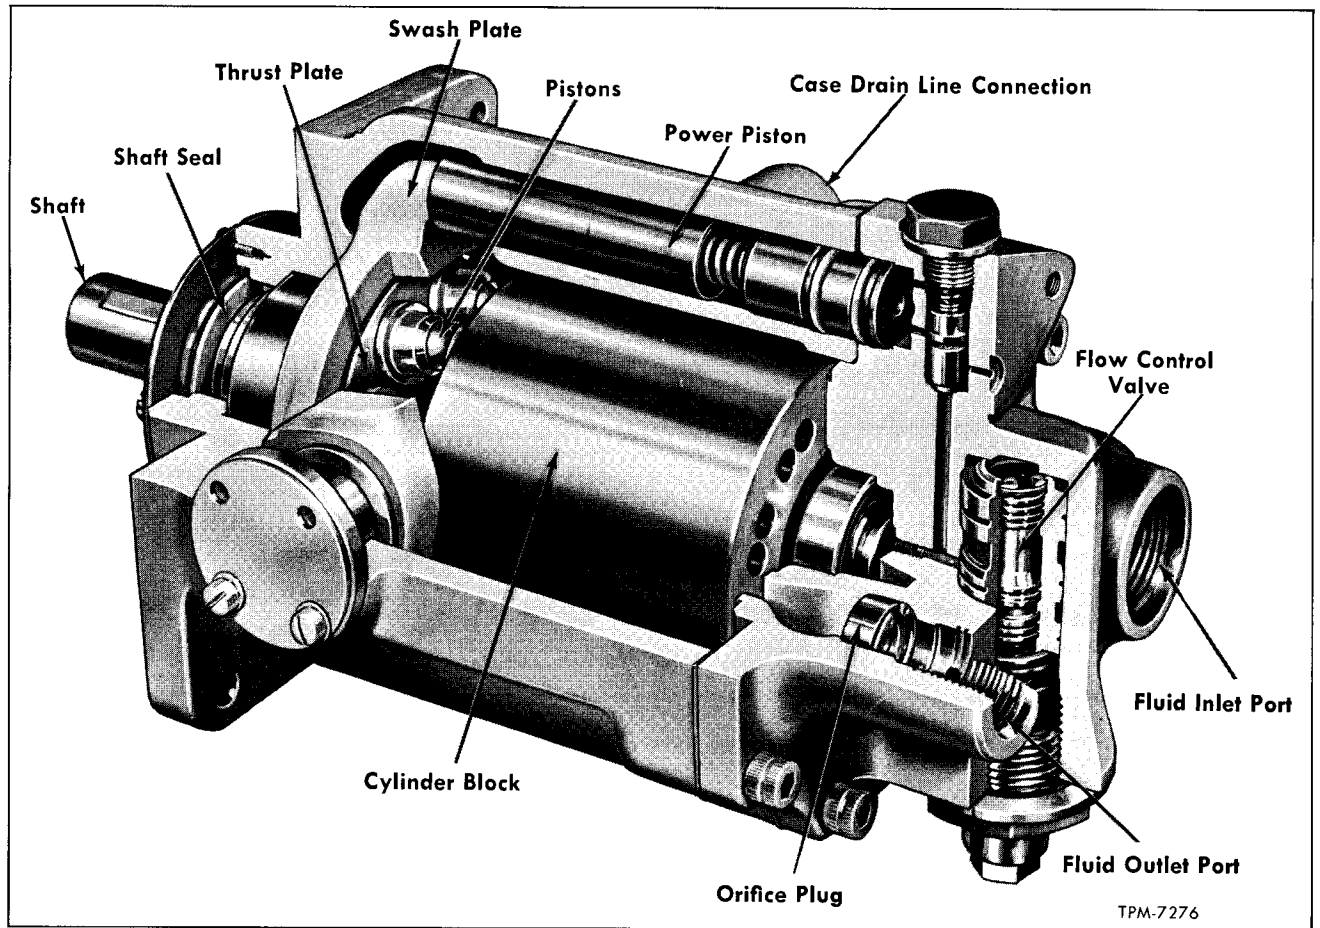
Cut-Away View of Condenser Fan Drive Pump
